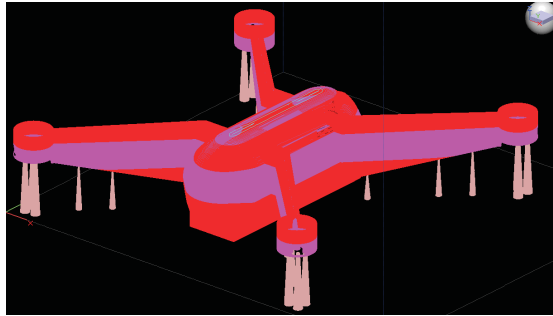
In addition to the auto-generated external support structure, additional anchor columns were added.
